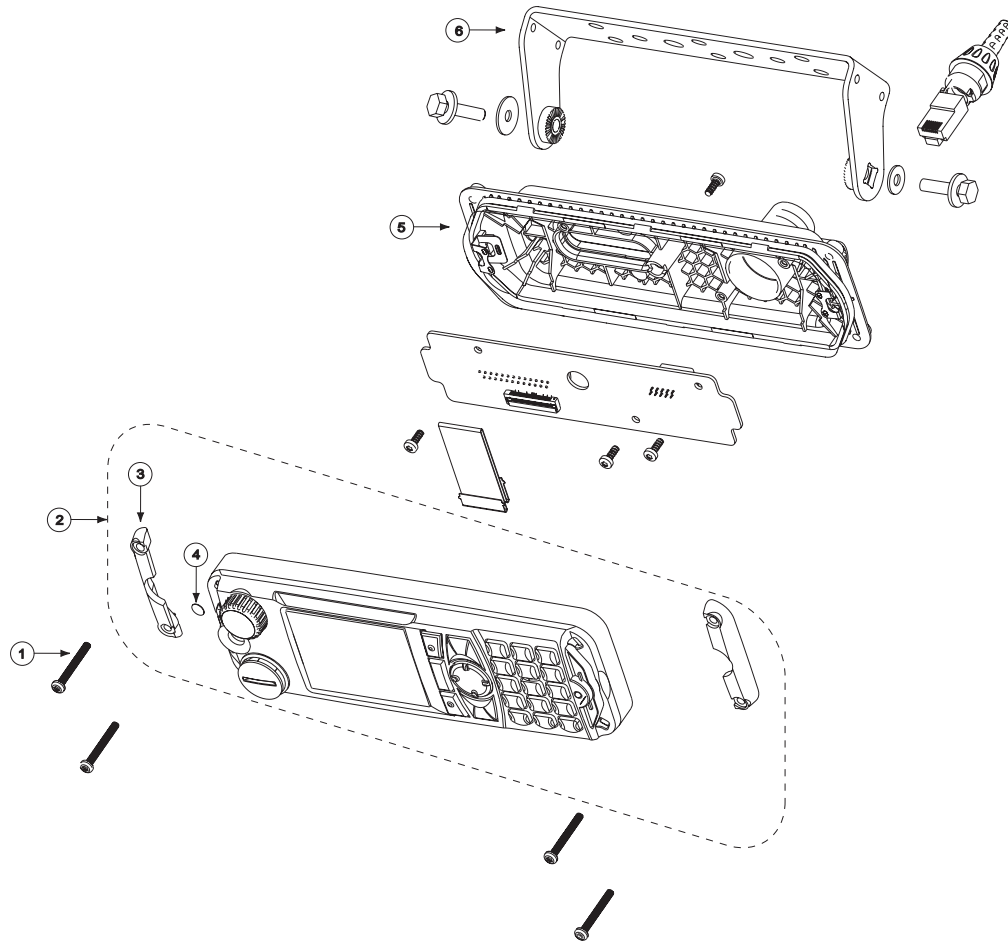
Motorcycle Mount Enhanced Control Head – Exploded View
